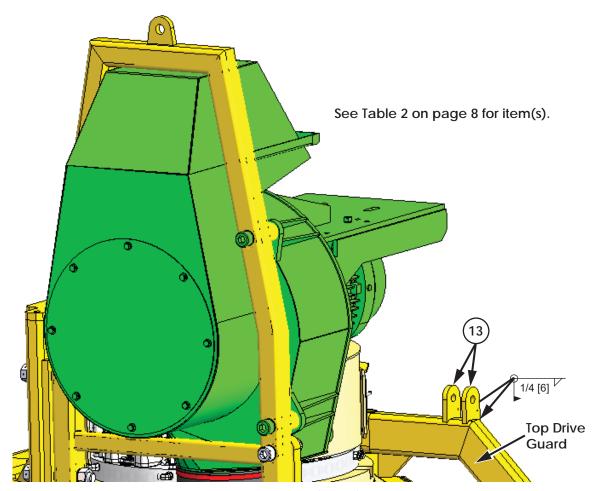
Welding pad eyes - item 13 (2 each) - to Top Drive Guard
